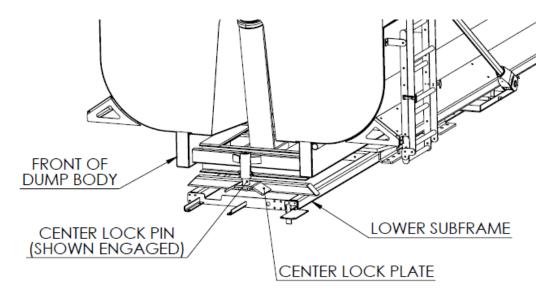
A - CENTER LOCK PIN ENGAGED
